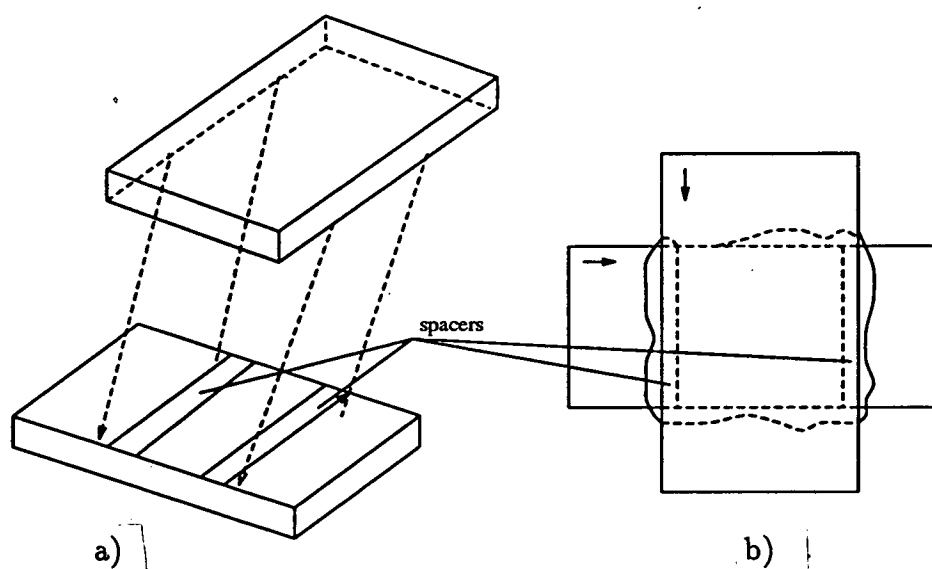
Assembly of SLM, showing spacers and opening for vacuum filling
